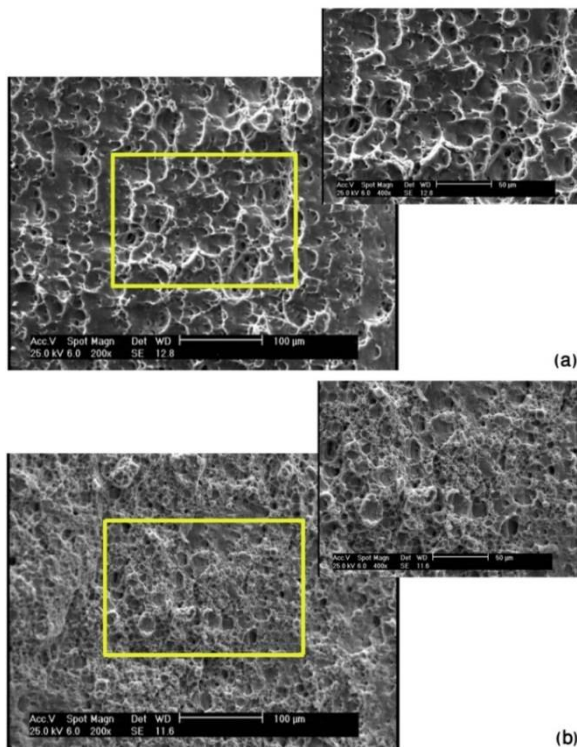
Fracture surfaces of a) FS and b) FSV processed specimens
